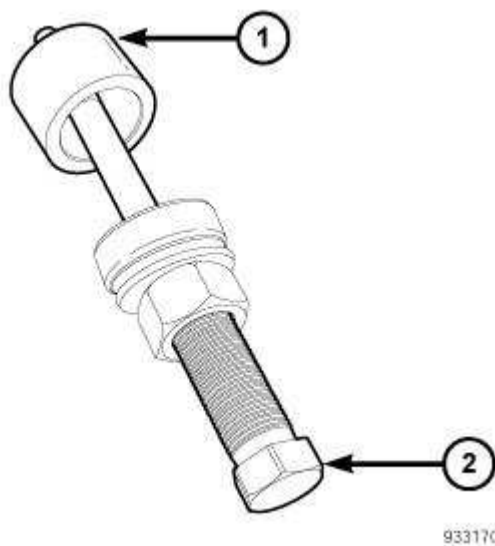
Removing/Installing Crankshaft Damper Bolt
